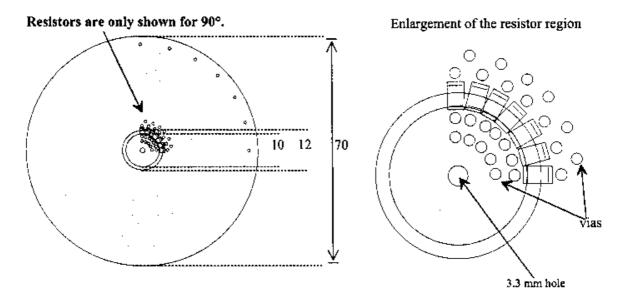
Mechanical drawing of a coaxial target, part 1/5
